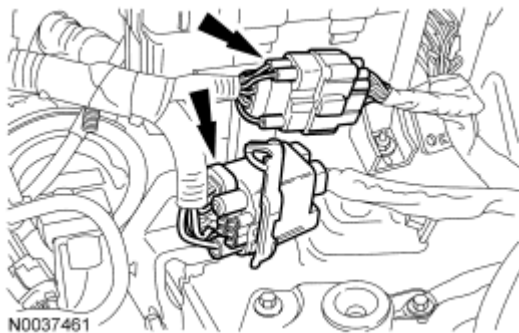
Locating Engine Wiring Harness Electrical Connectors
